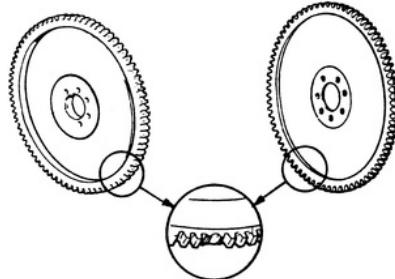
Check the ring gear's teeth for damage; if damage is noted, replace the ring gear
